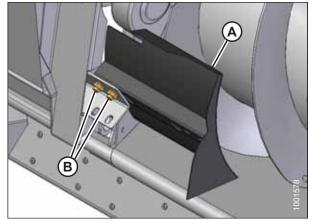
Replacement Deflector – Left Shown, Right Opposite
